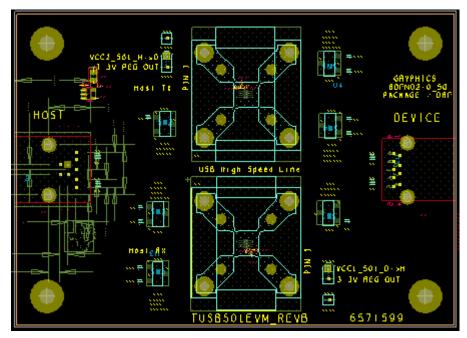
TUSB501 EVM Layout Layer 4 (Bottom-View)
